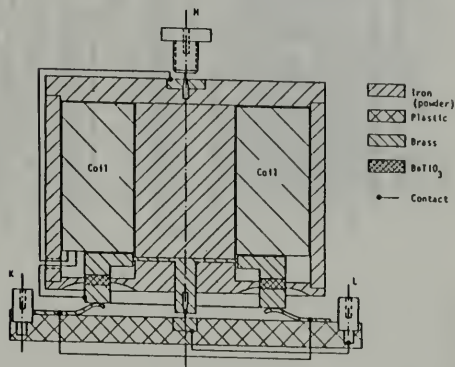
Scheme of the BUL-CUB MACHINE WITHOUT STATOR.
